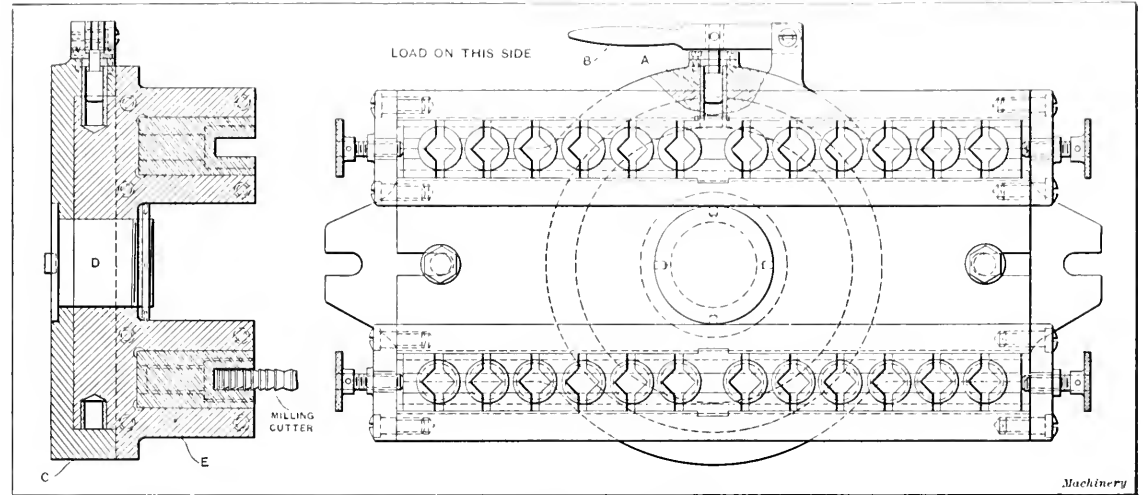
Milling Fixture which proved Unsuccessful for milling the Slot in the Push Rod shown in Fig. 1
